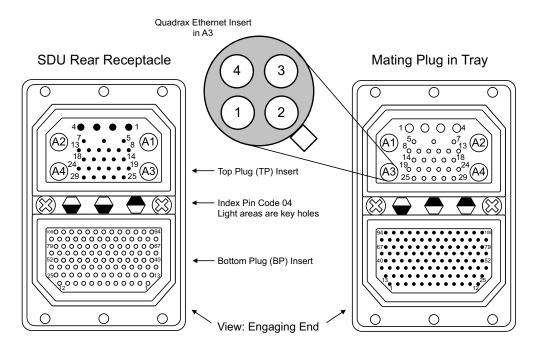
SDU Rear Receptacle and Mating Plug in Tray, Engaging End
